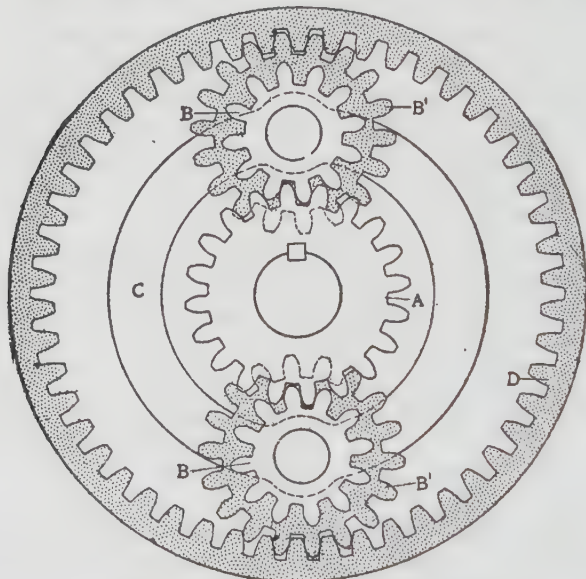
INTERNAL GEAR PLANETARY COMBINATION WITH DOUBLE PLANETARY SETS.
